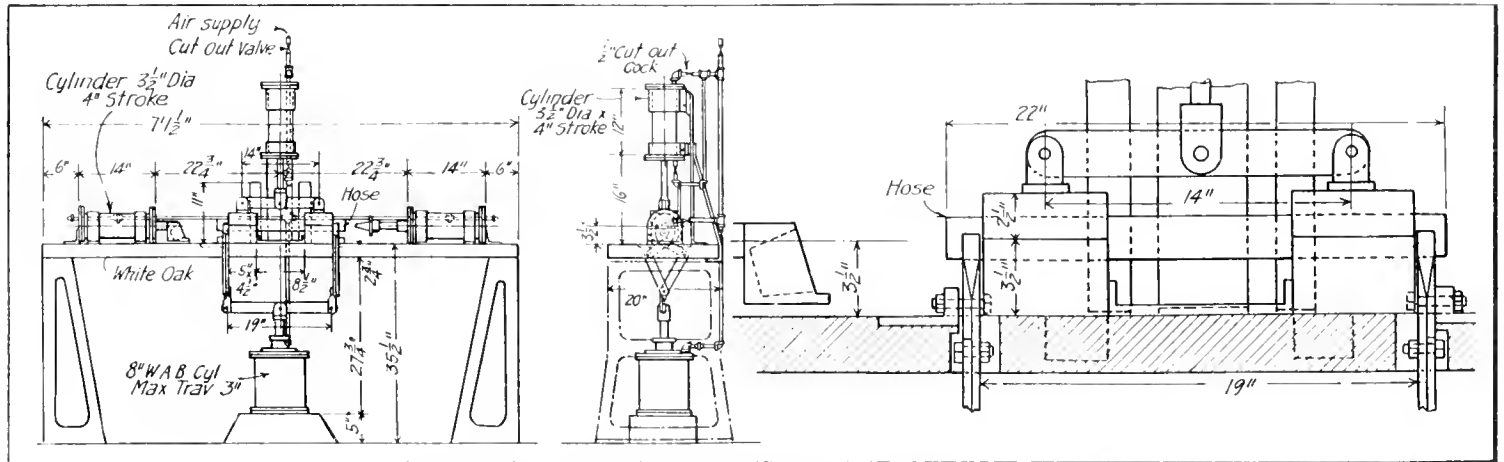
C.N.R. Hose Mounting Machine, with Detail of Clamping Heads.
